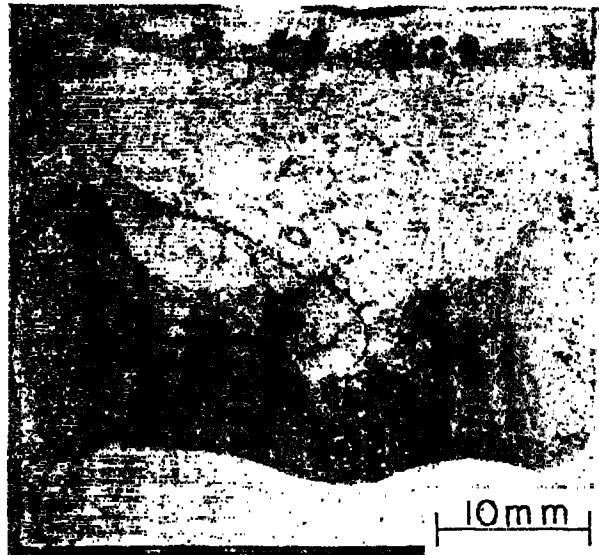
Fracture surface of specimen J, the HY-180 fine-bead, as-welded, GTA weldment
